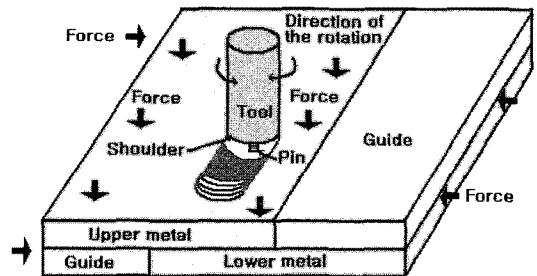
Typical weld tool and process parameters used in the FSW process
